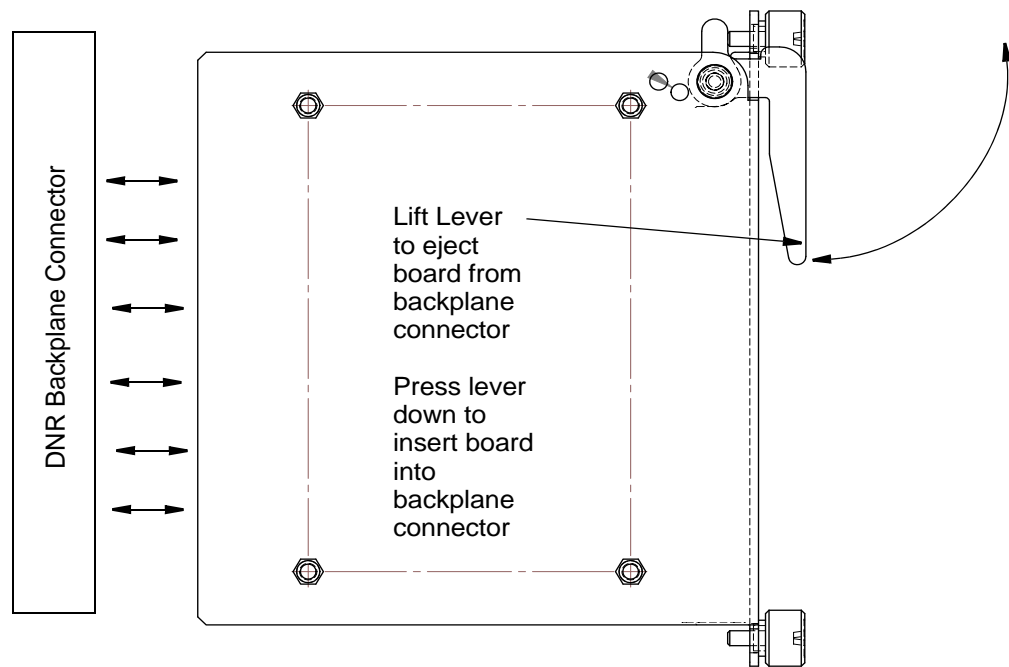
DNR Board Ejection/Insertion Lever Operation
